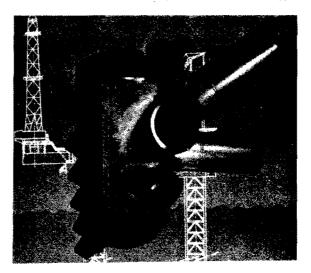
Precast Leg Node for Jack-up Rig (Ohba, et al. (31))
